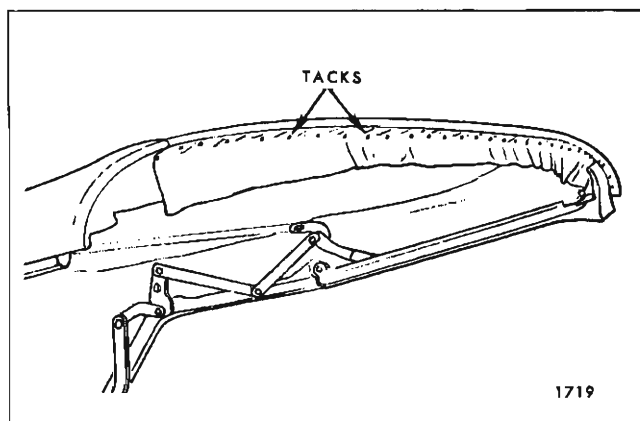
I-37 — Installation of Top Material To Front Roof Rail
